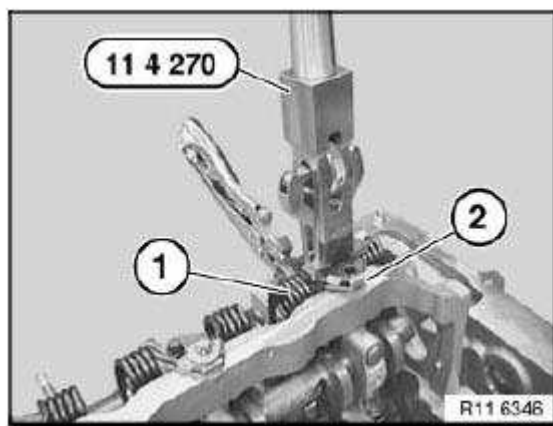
Special Tool (11 4 270), Torsion Spring And Metal Lug
